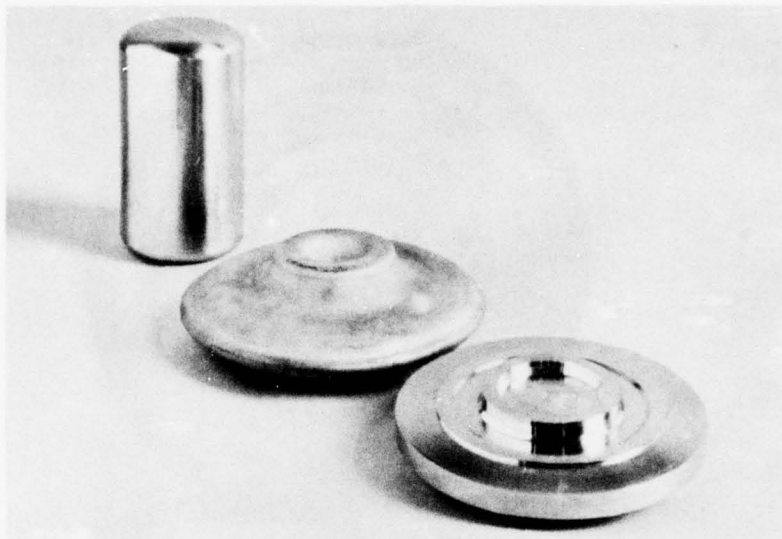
HIPed BILLET, FORGED OUTLINE AND SONIC MACHINED 8-in DISC IN APK 1
